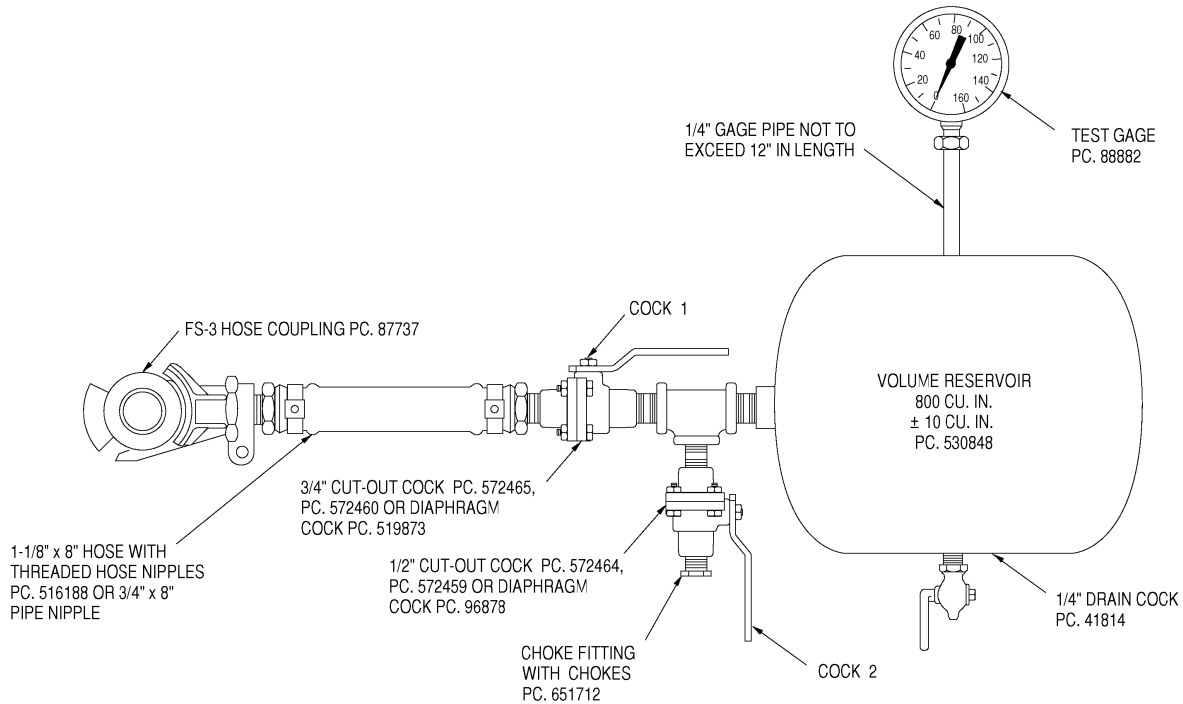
Alternate Rack for Testing the Passenger Single Car Testing Device
